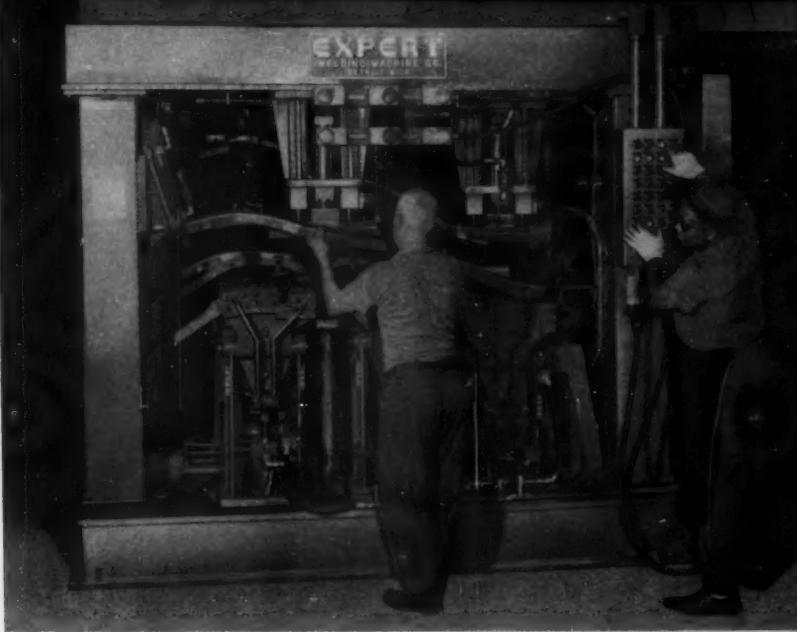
Two washers are welded to each No. 2 cross-member on this machine. Hoppers and loading chutes automatically position the washers.
